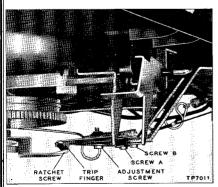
Trip-Finger and Trip-Receiver Adjustments
